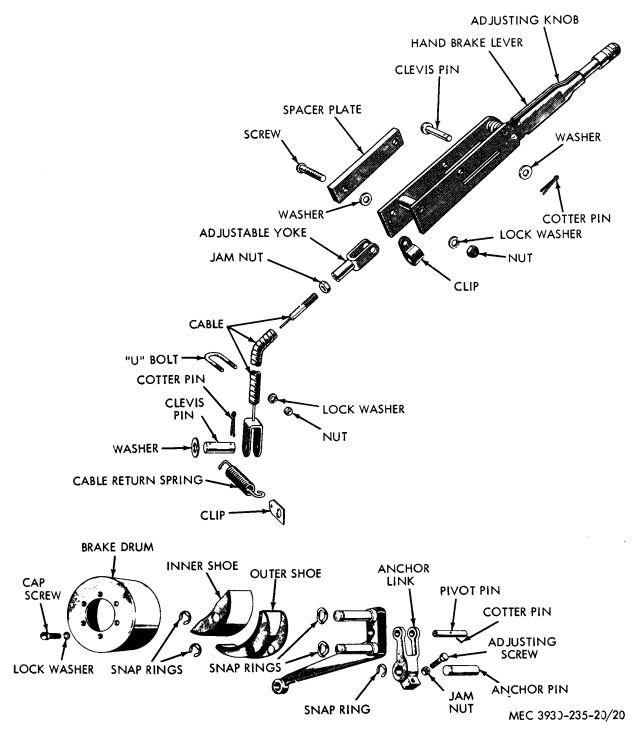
Handbrake, lever, cable, and linkage; exploded view.
